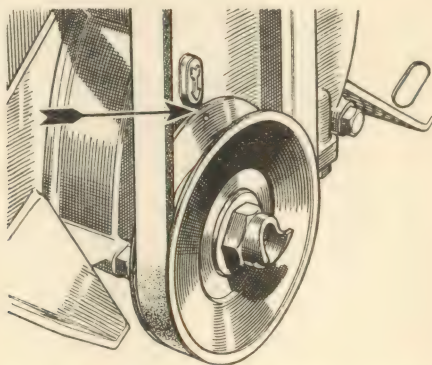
T.D.C. MARK ON MORRIS ENGINES
